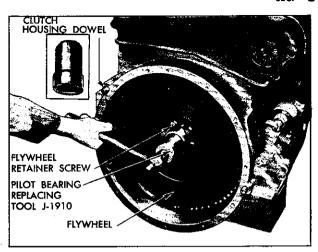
Replacing Pilot Bearing in Flywheel with Tool J-1910
